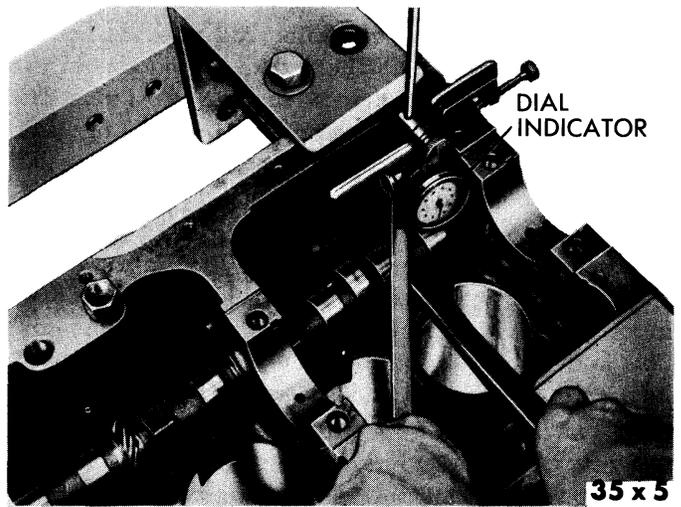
Measuring Camshaft Bearing Clearance—6 Cylinder Engine Typical of V-8 Engines
